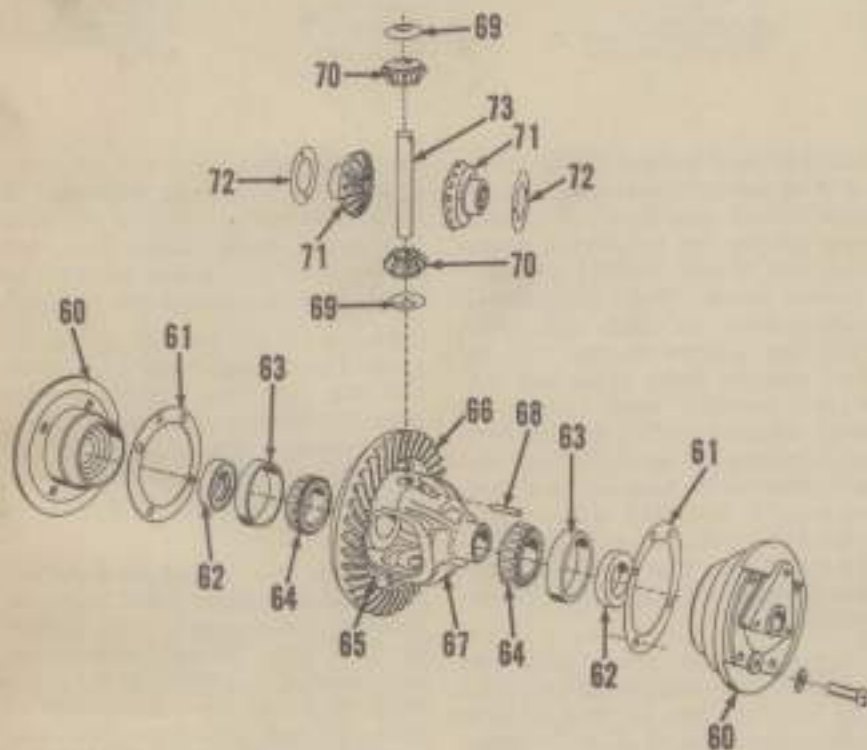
Exploded view of the D-14 and D-15 differential unit including the bearing carriers (60). The main drive bevel gear backlash adjustment is accomplished by transferring shims (61) from under one bearing carrier (60) to the other as required to obtain the desired backlash of 0.007-0.012.
